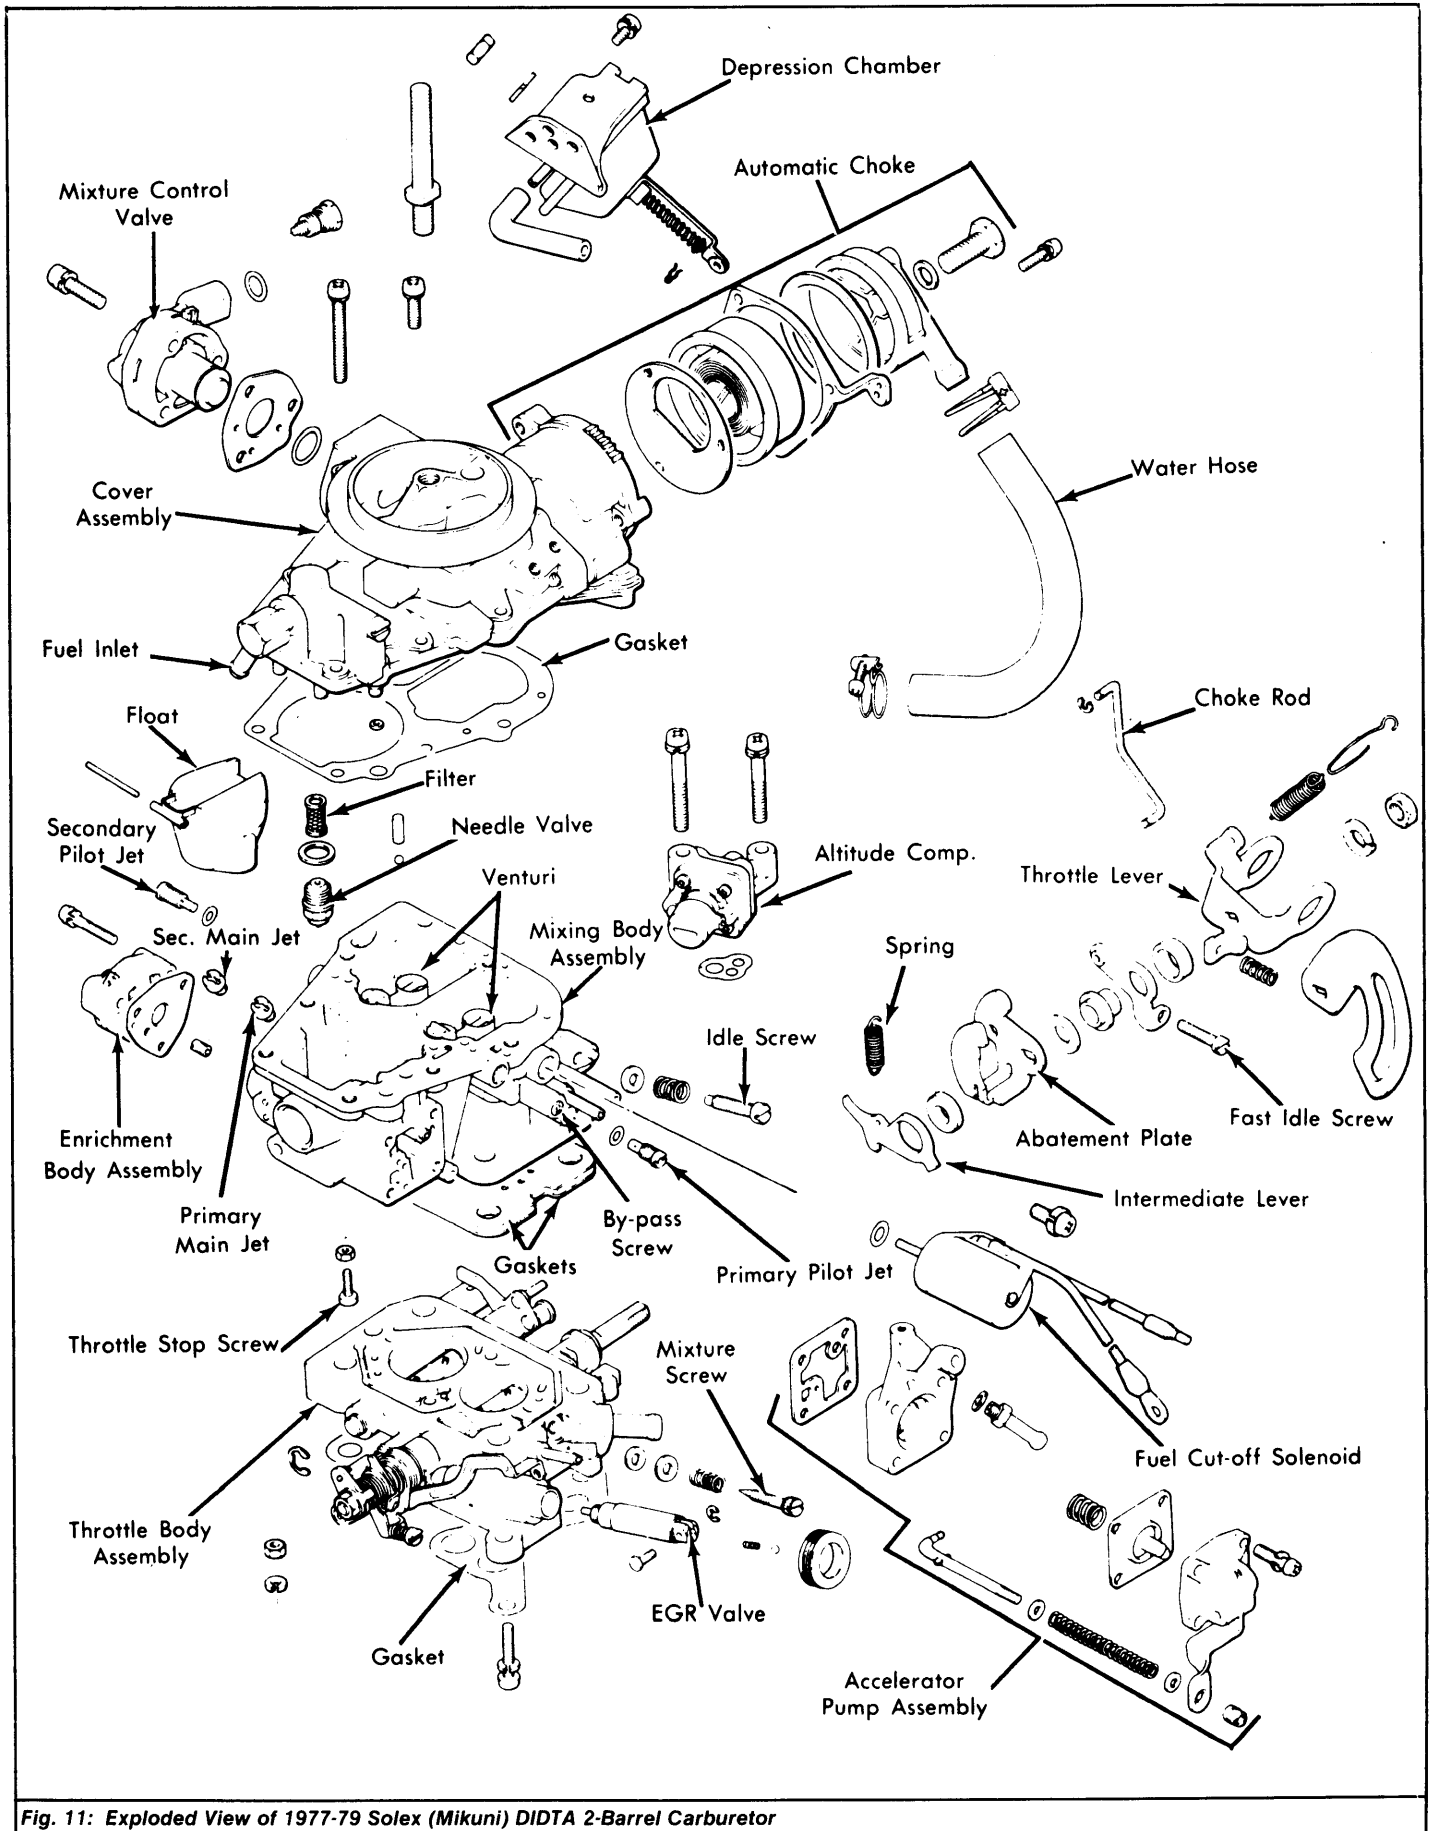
Exploded View of 1977-79 Solex (Mikuni) DIDTA 2-Barrel Carburetor
